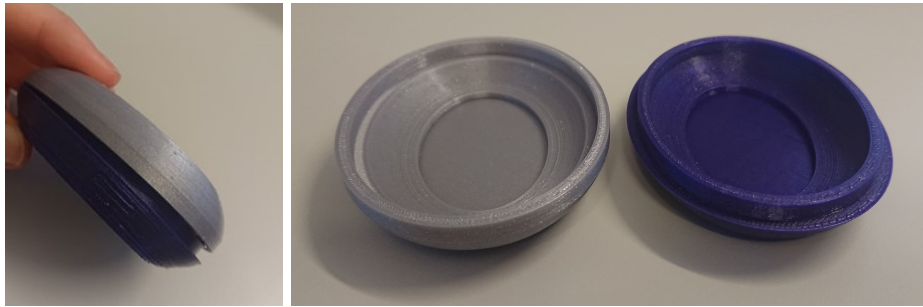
Bigger test print with working closing mechanism where the parts were printed on different printers
